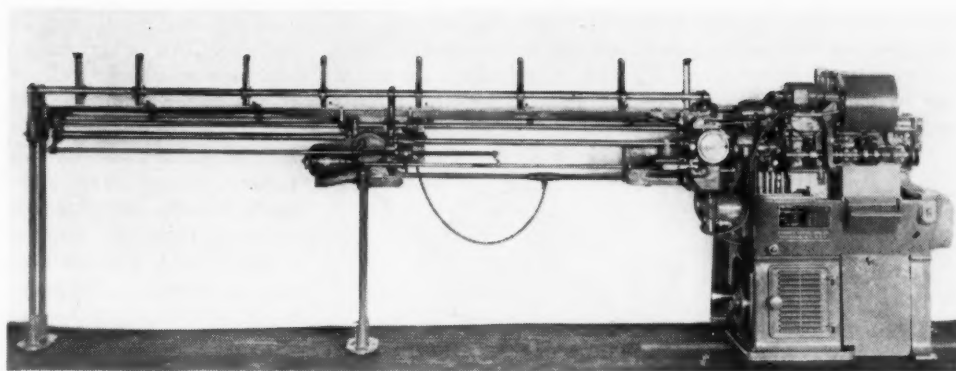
ROD MAGAZINE ATTACHMENT FOR AN AUTOMATIC SCREW MACHINE
